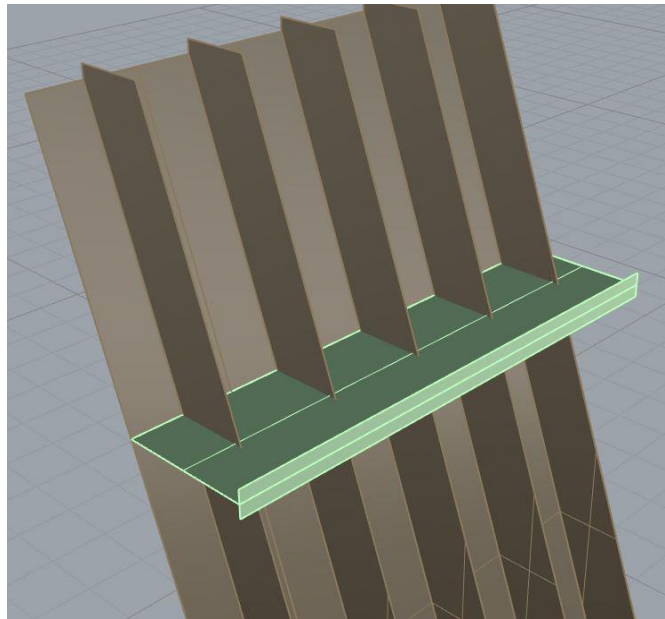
Fully Welded Connection - Isometric View
